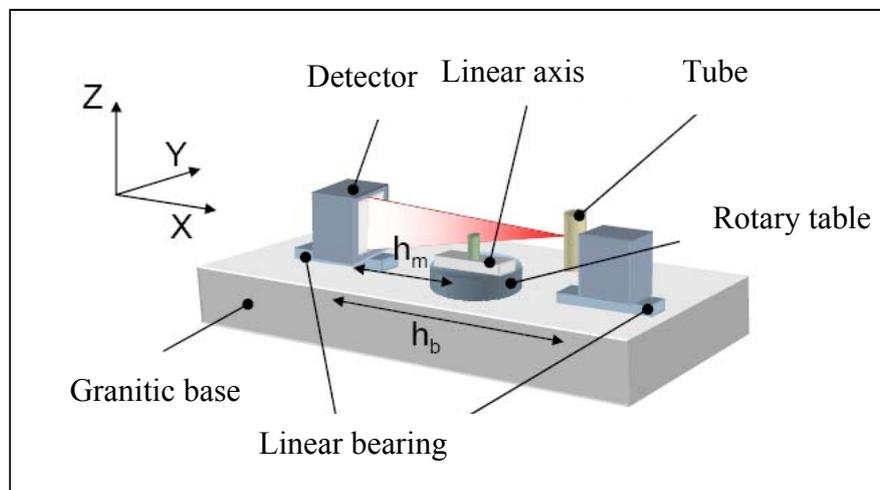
Experimental setup. The workpiece (Shaft) is mounted on the linear stage which is fixed on the rotary table. [6]
